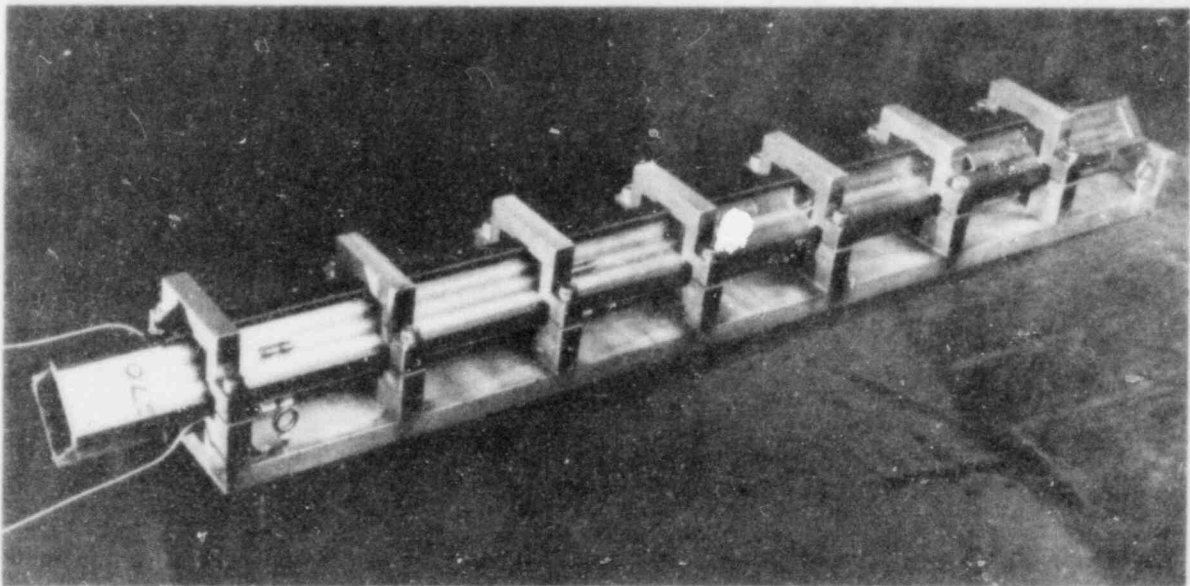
Zircaloy Shroud Clamped in Shroud Fixture
